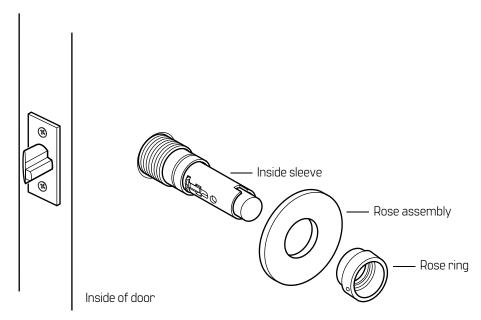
Reinstalling the inside rose assembly and rose ring
